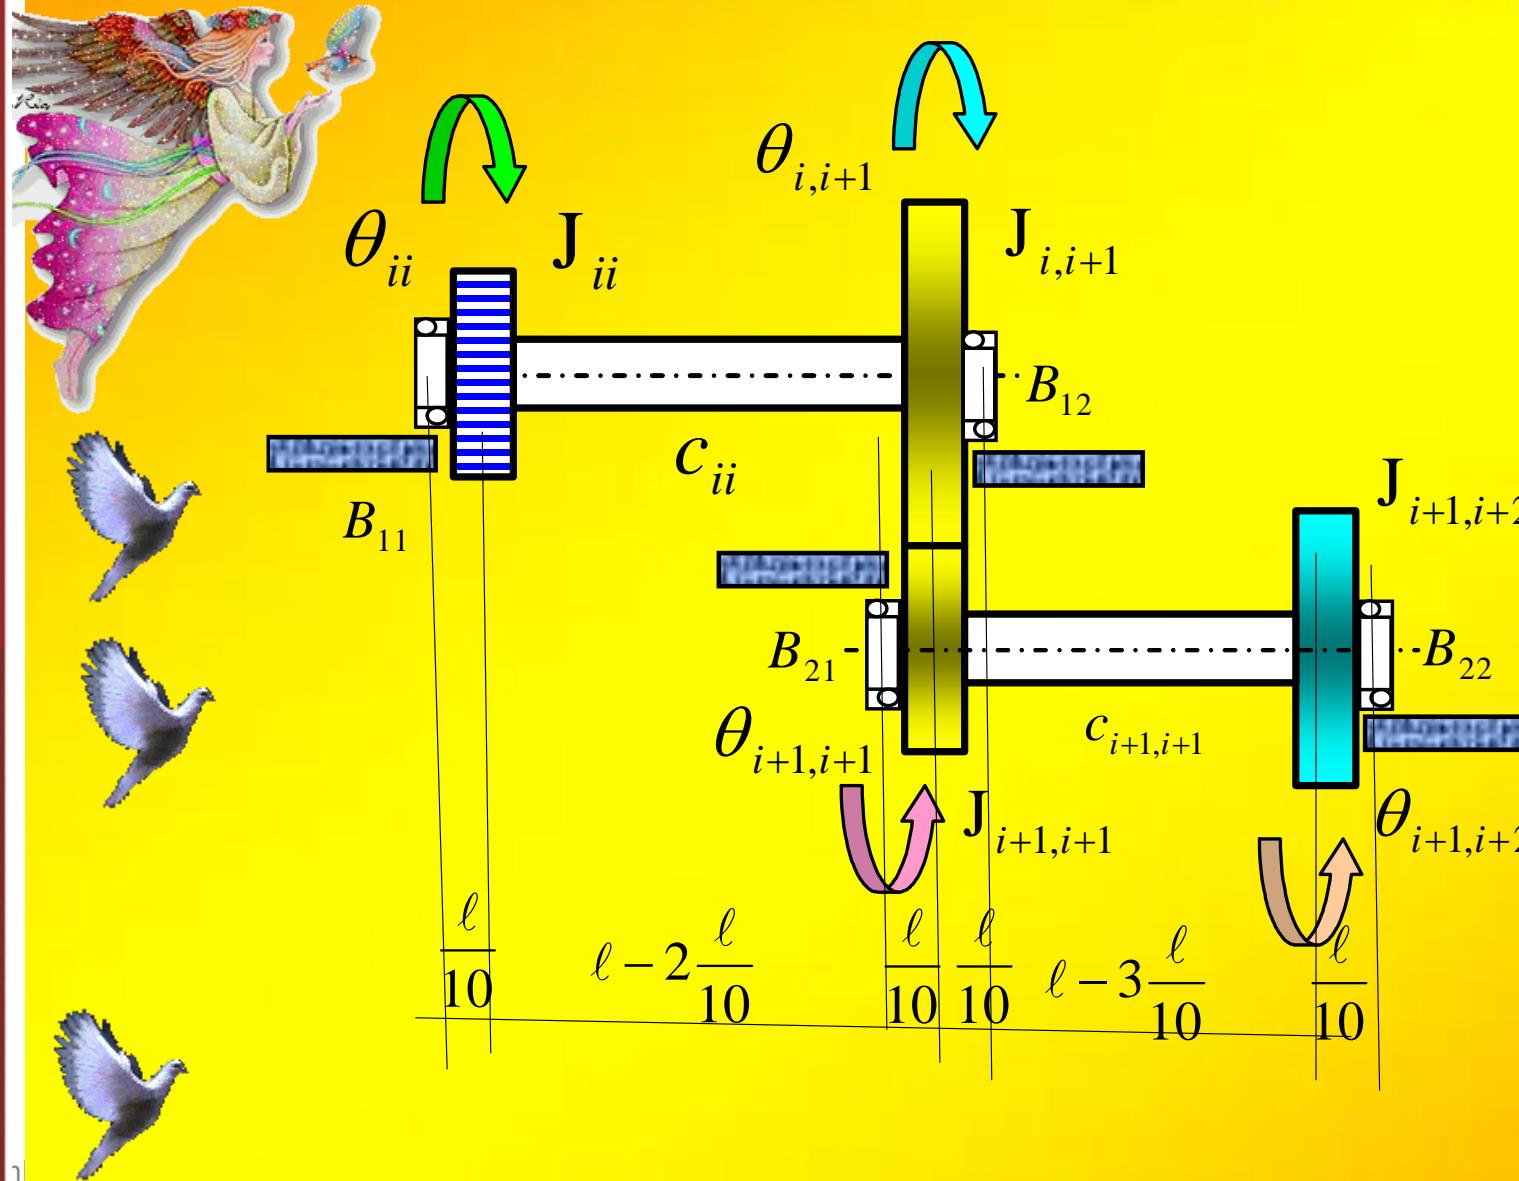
Configuration of radial ball bearings on the shafts of a two-stage gear transmission with unbalanced gears (with debalances in the form of eccentrically placed material points)
